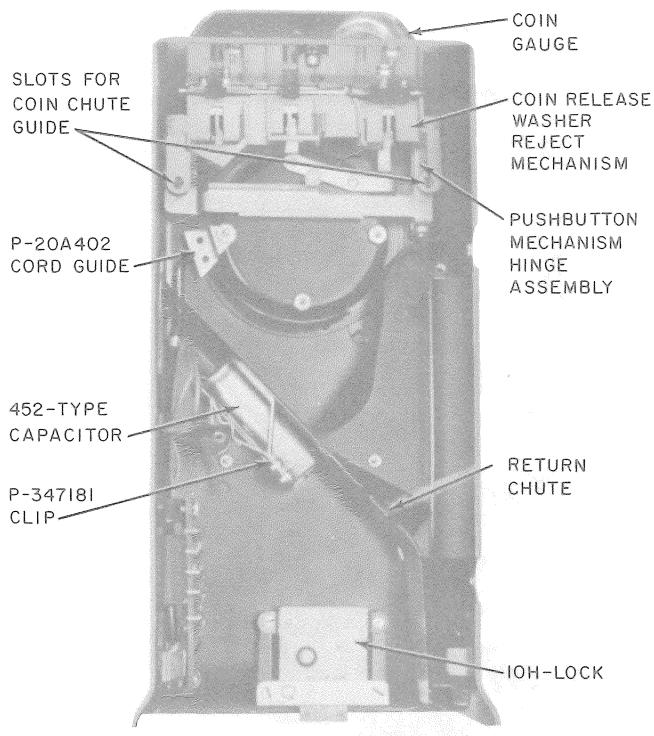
Upper Housing, Coin Chute Assembly Removed
